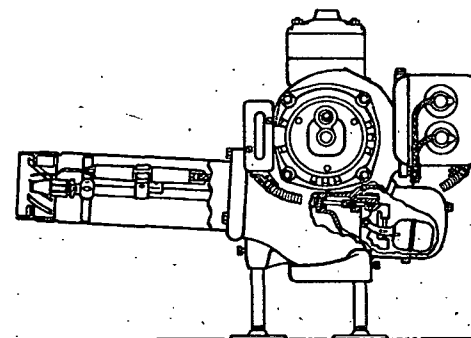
LOW PRESSURE ATOMIZING OIL BURNER
